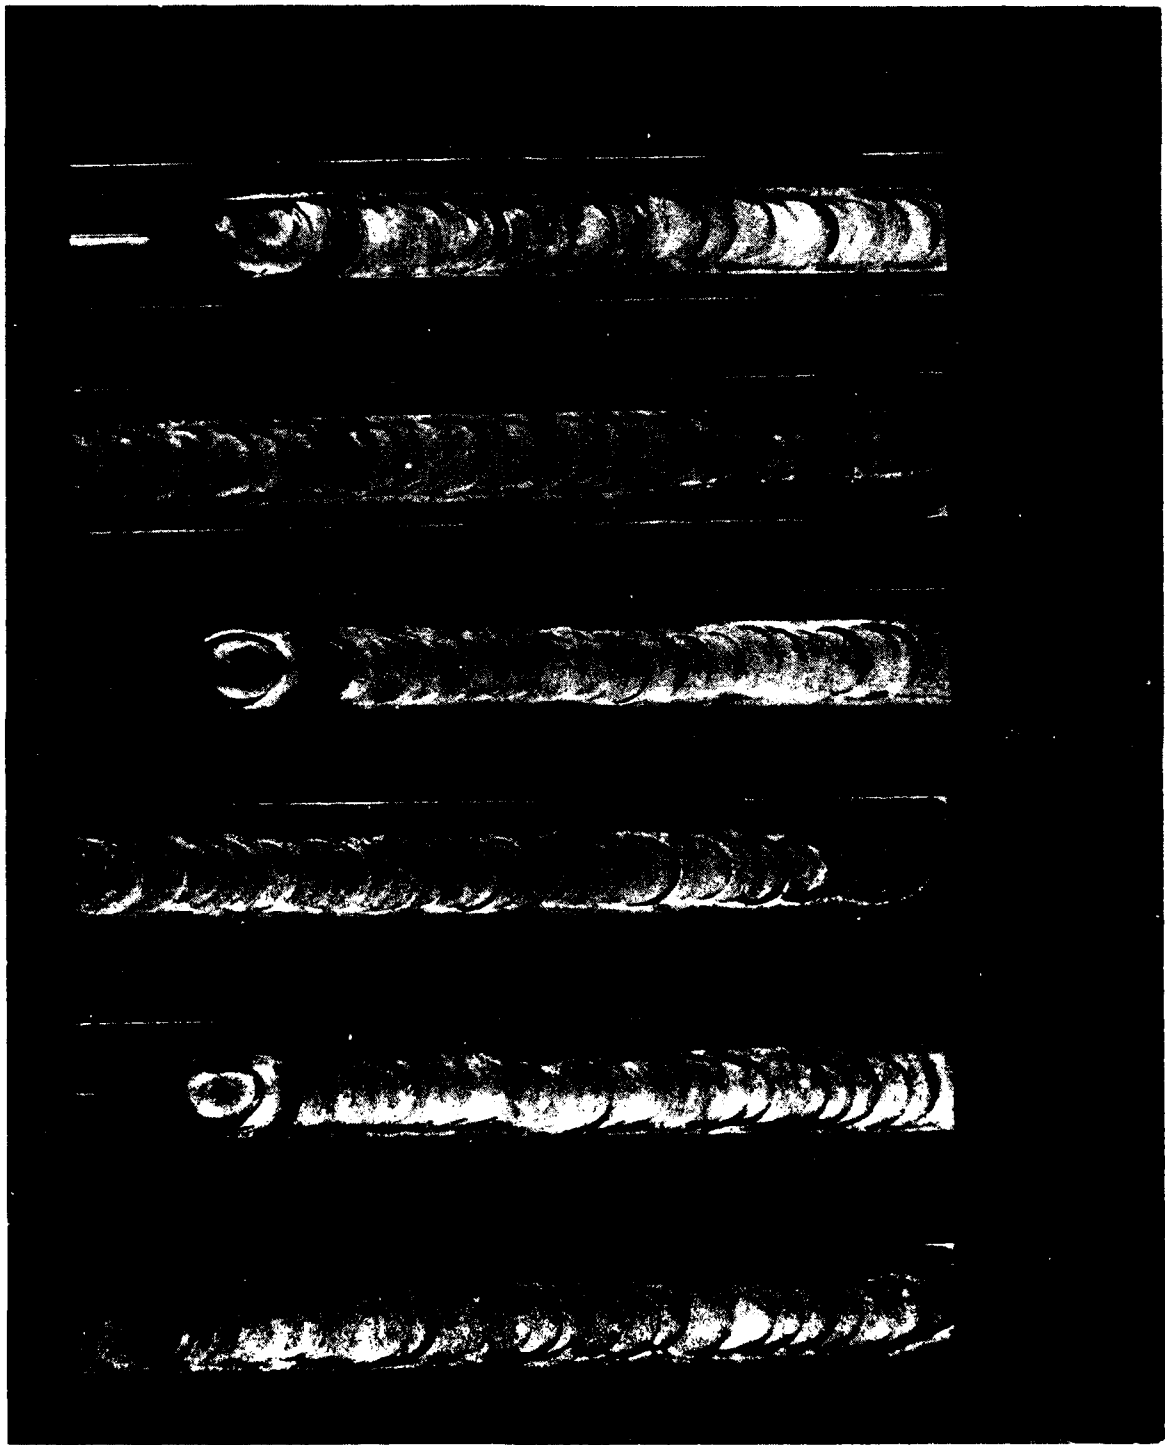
Aluminum Alloy Type 5086 -- Specimens: Pretest
